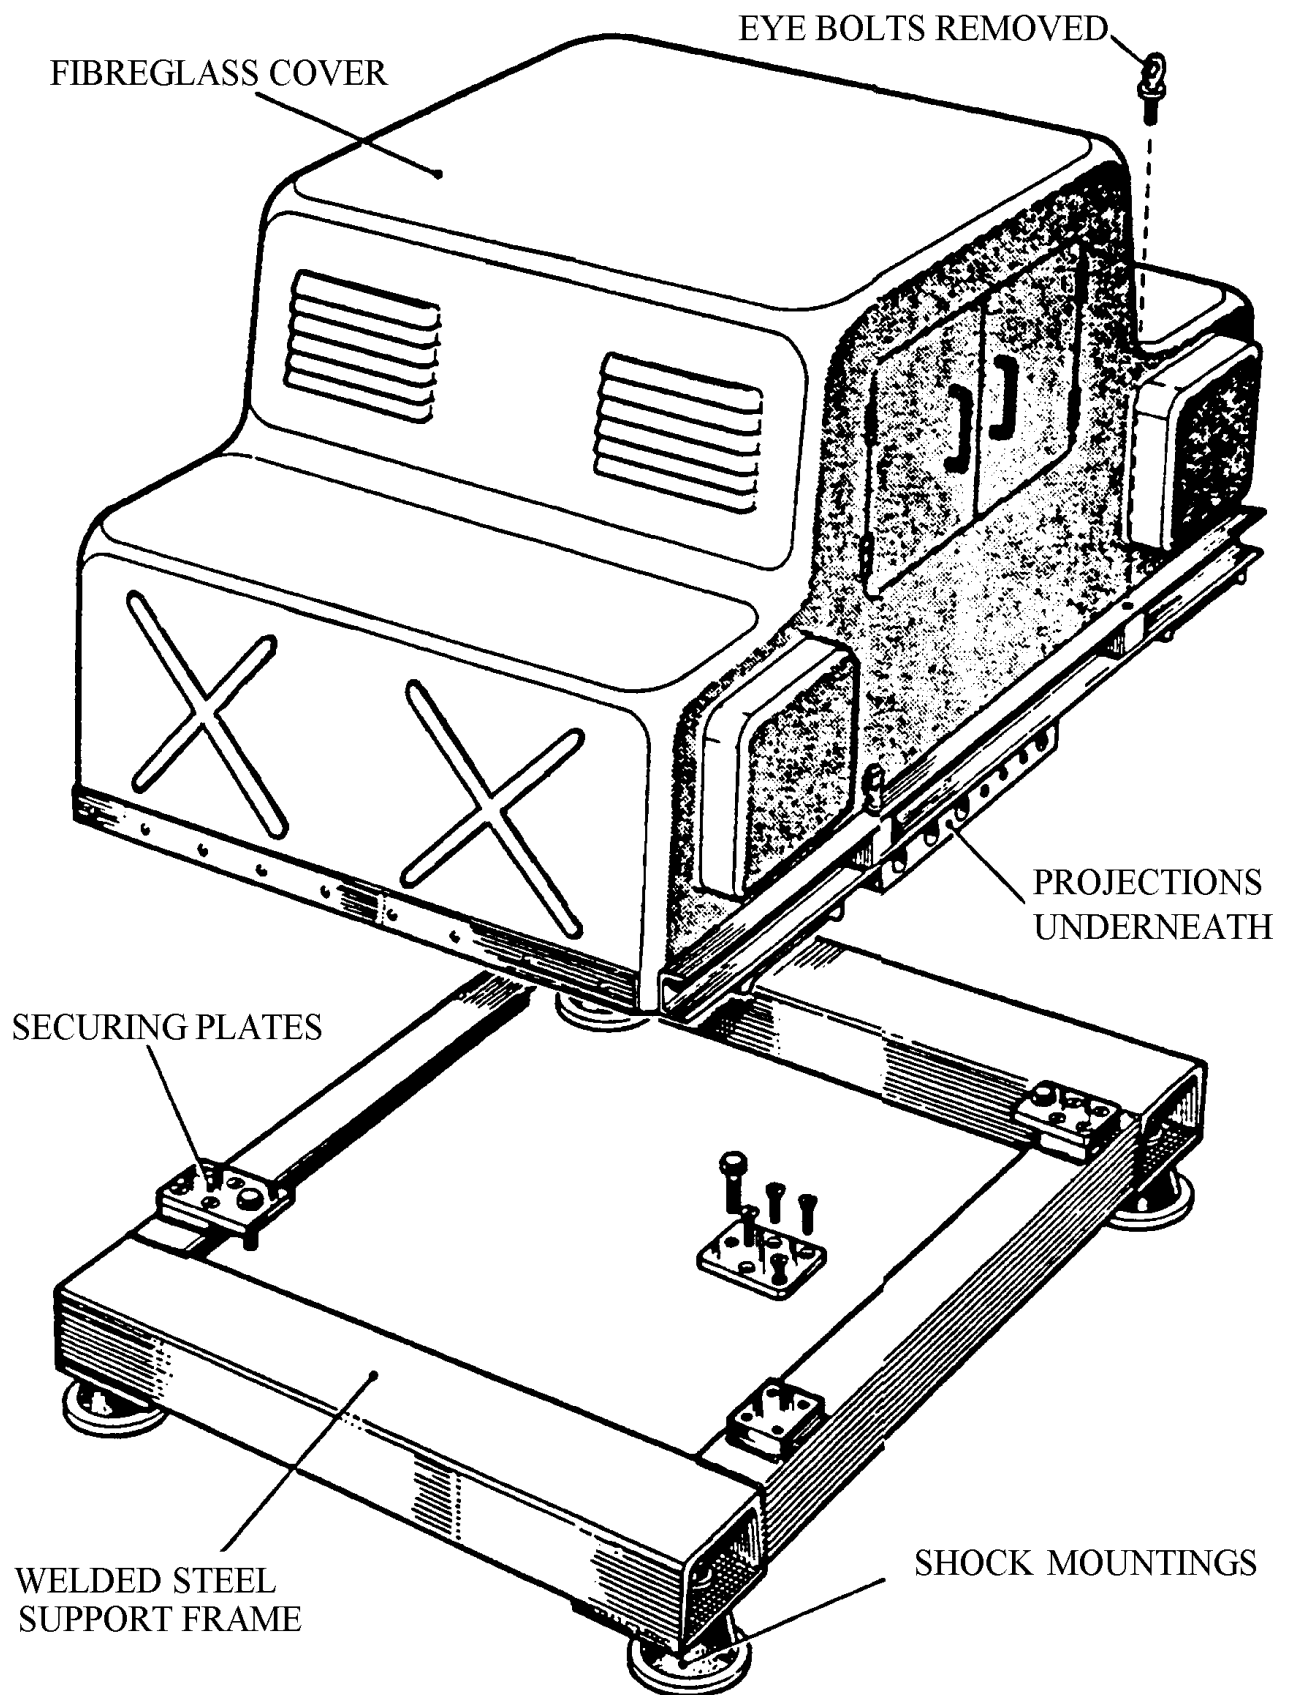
A METHOD OF LOCATING A HEAVY FRAGILE
